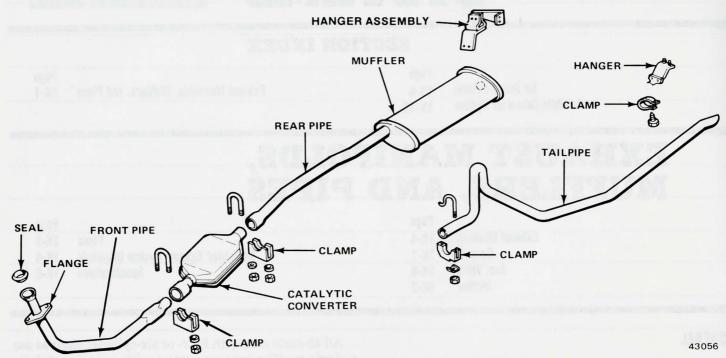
K-2 Exhaust System—Six-Cylinder with Converter
